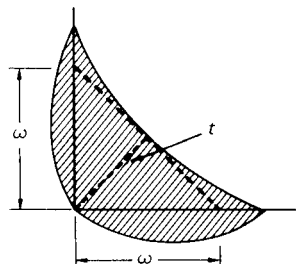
Leg size (ω) of a fillet weld. t , throat
